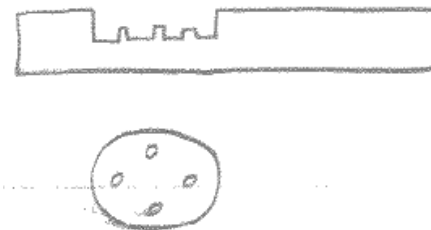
Attachment with holes on bottom of the seat and blocks on beam
